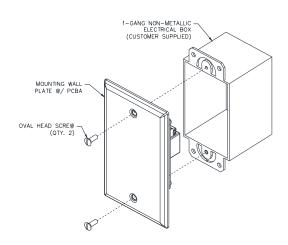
Wall Mounting Plate to Single Gang Box Installation
